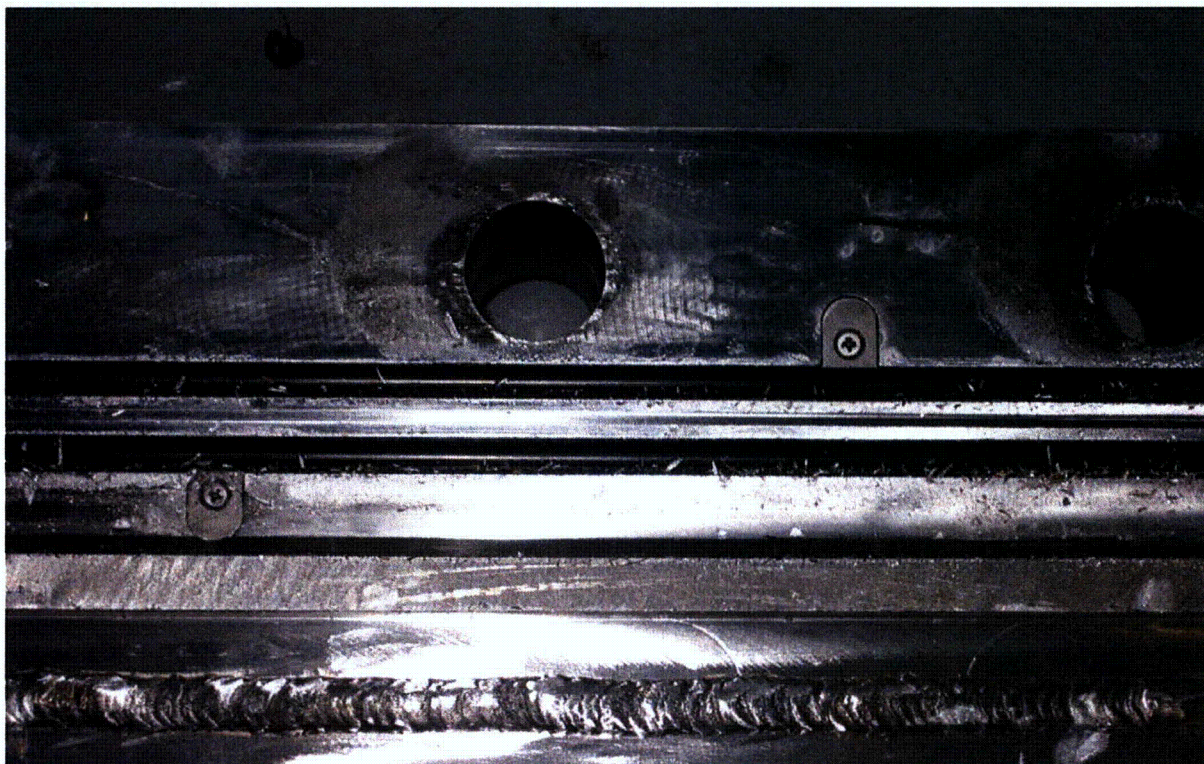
Debris on Closure Lid Seals (Right Side, Bolt Hole #15 in Center)
